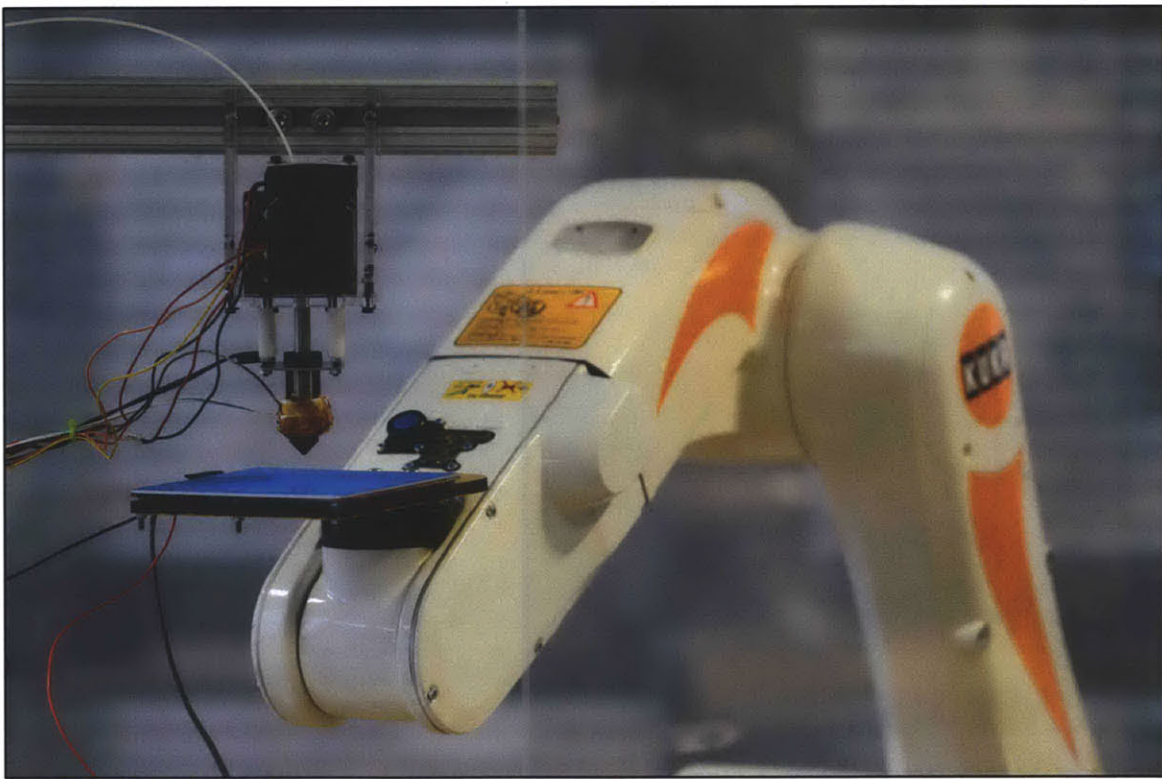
The 3D printing configuration using an external fixed extruder. The robotic arm manipulates the heated build platform around the fixed extruder to construct structures through multi-axis printing.
